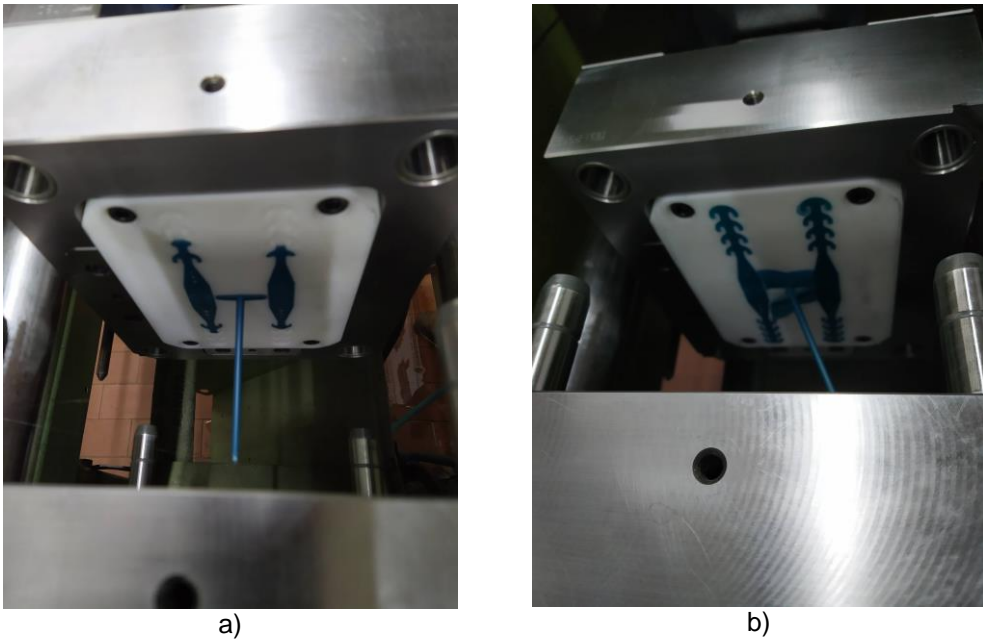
a) *Insufficient filling of the mold cavity and b) flashing on the parting surface
